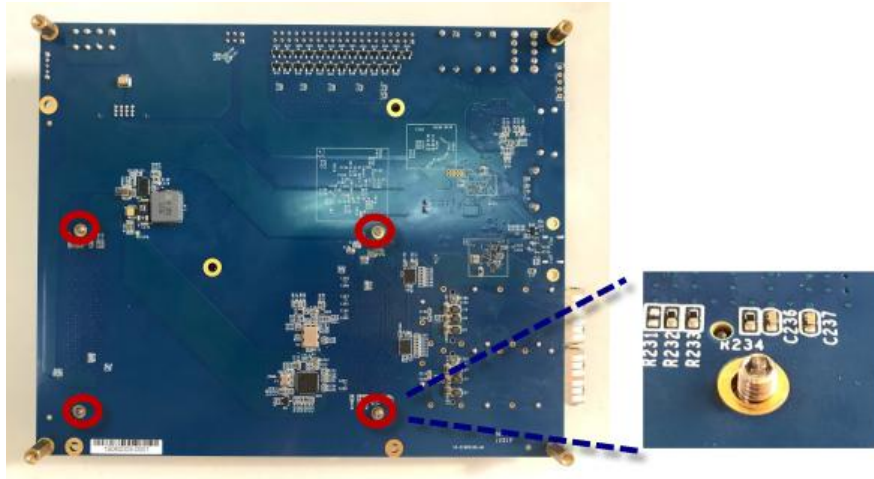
Push Apollo Carrier Board onto JSOM-T
